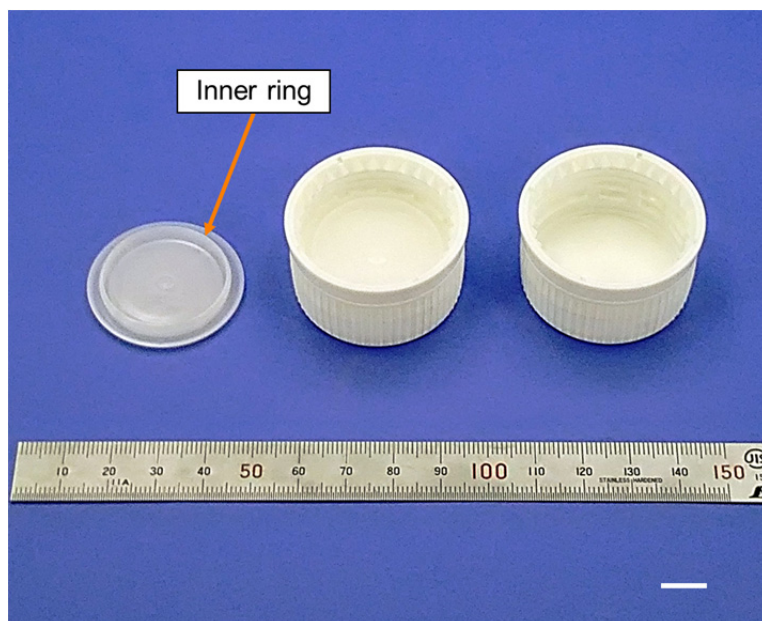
Appearance of a two-piece closure. A sealing part, assembled sealing and shell parts, and a shell part are shown from left to right. The bar represents 10 mm.
